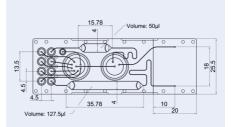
Detailed schematic drawing of large sensor integration area platform I - Fluidic 1004
